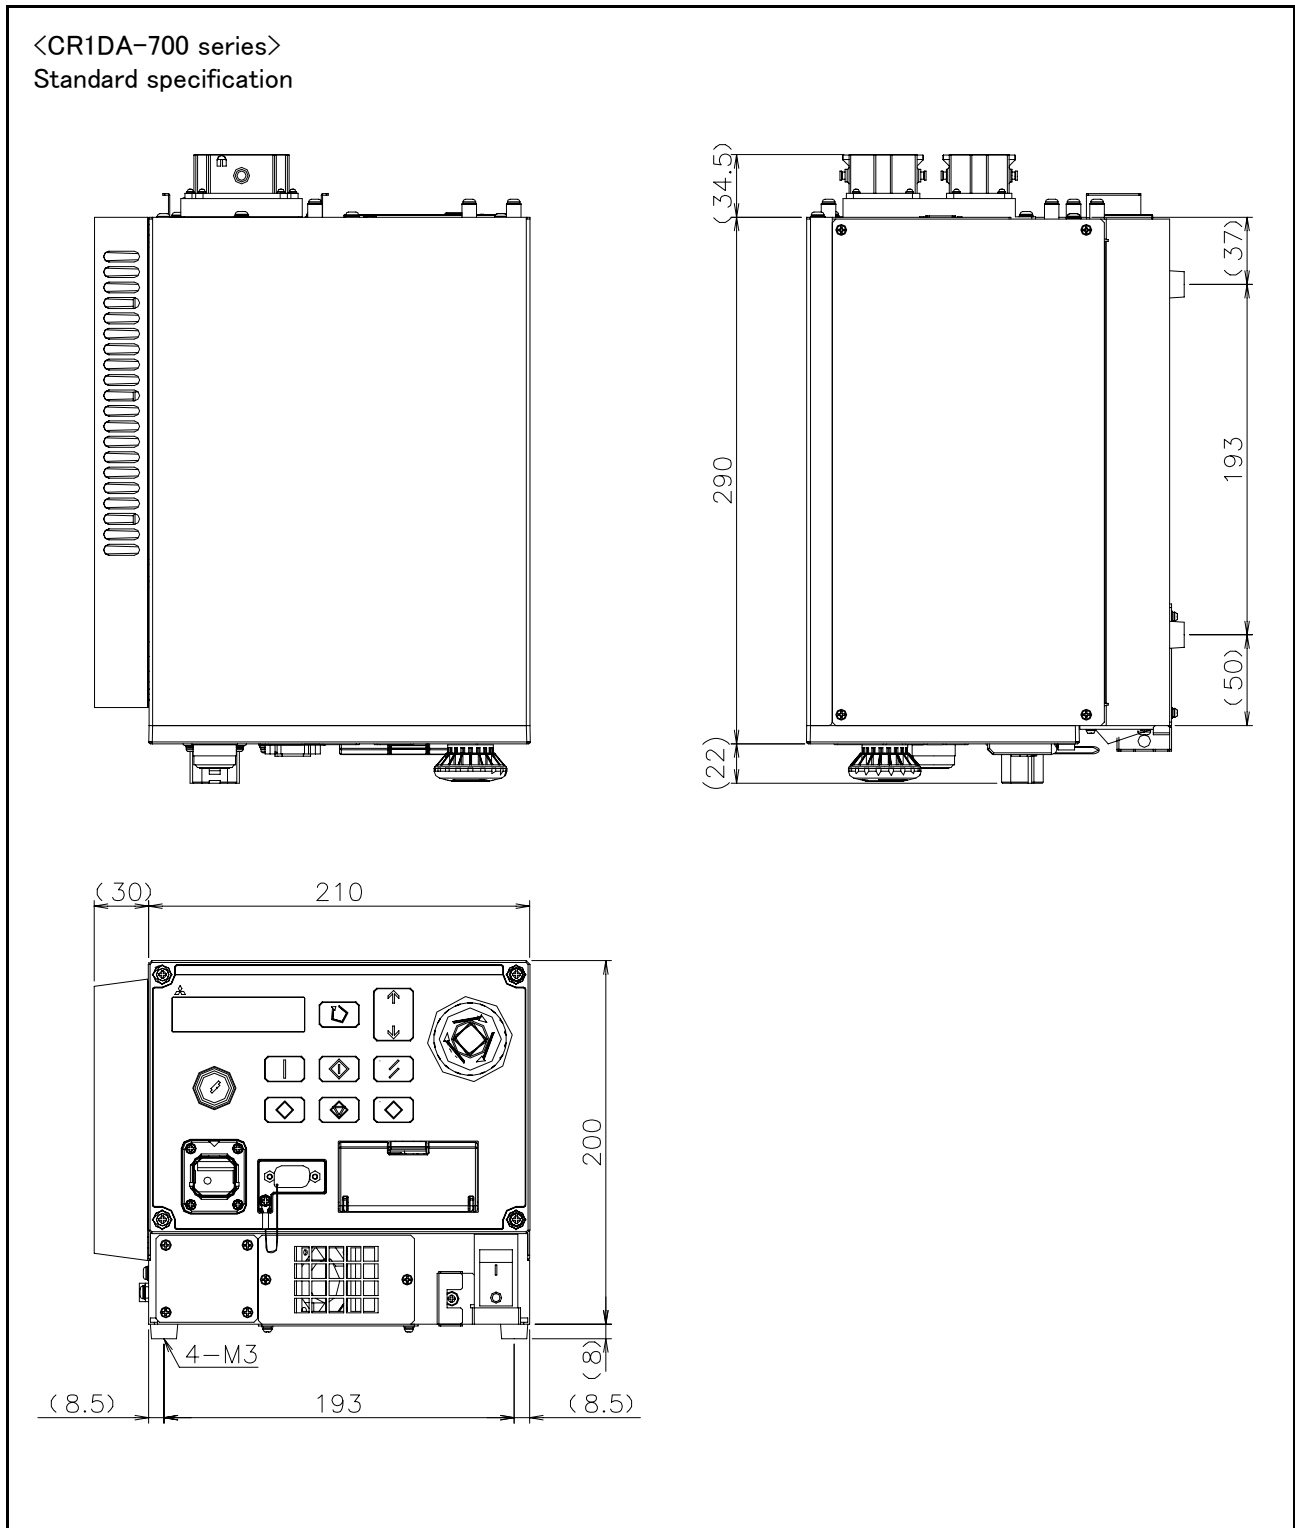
Outside dimensions of controller (CR1DA-700)
